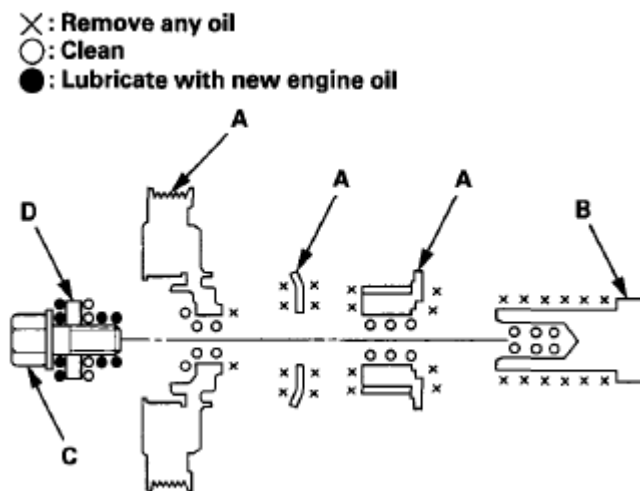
Identifying Pulleys, Crankshaft, Washer And Bolt
